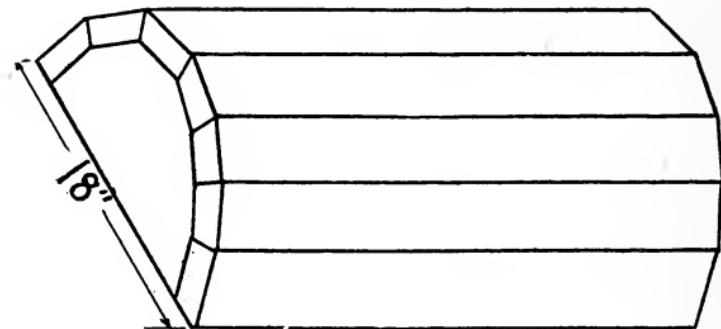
Half of a Large Cylinder, Staved or Lagged Up.
